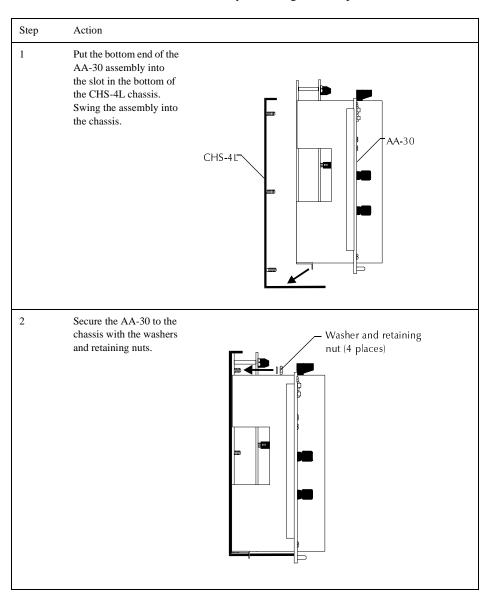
Mounting an AA-30 into a CHS-4L Chassis
